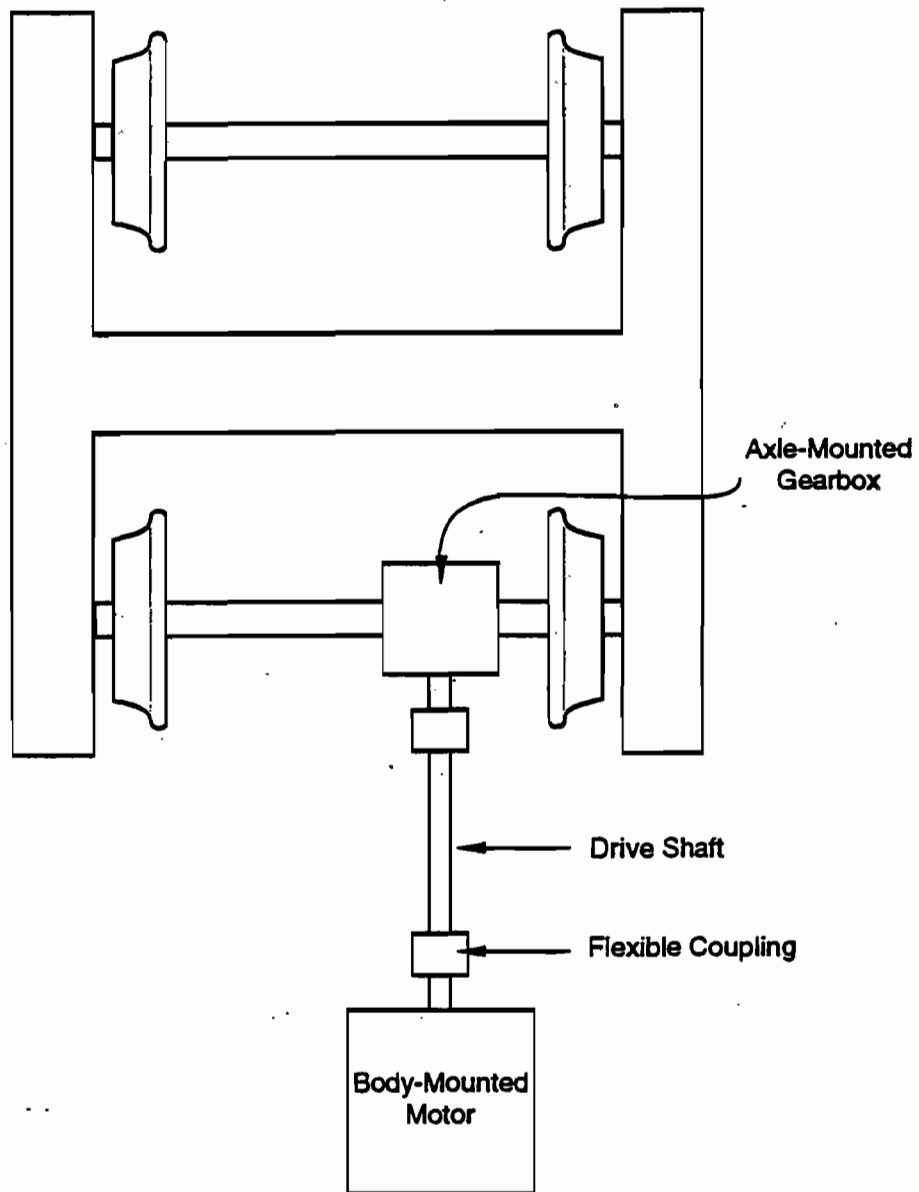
Transmission Shaft Drive Through Right-Angle Gearbox
